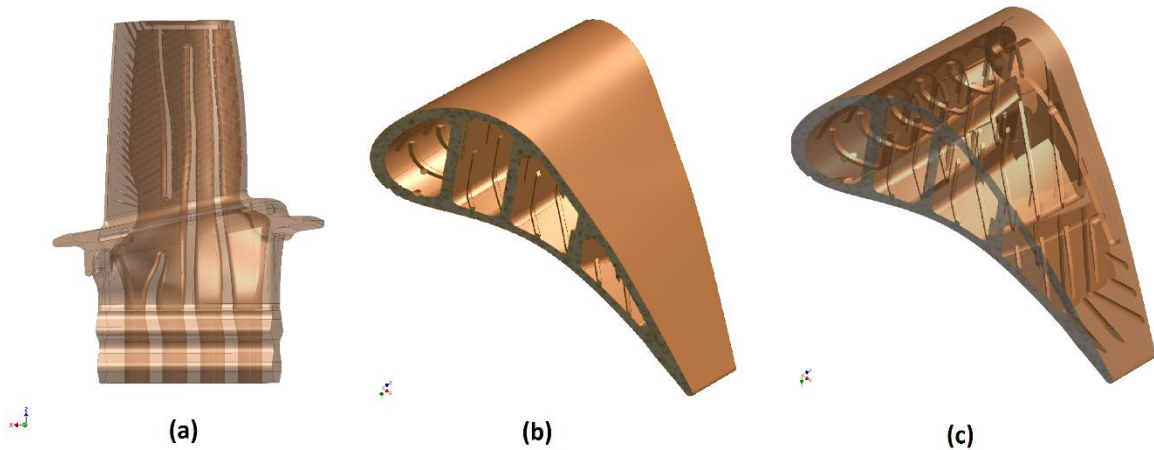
Typical high-pressure turbine blade (courtesy: Rolls-Royce). CAD geometry of blade (a-c)
